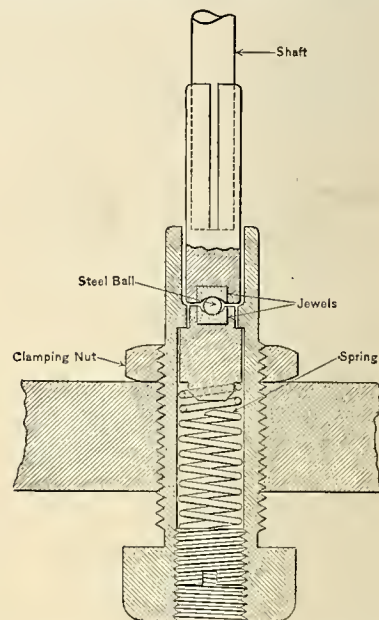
SPRING-SUPPORTED ROLLER TYPE OF BALL BEARING.
